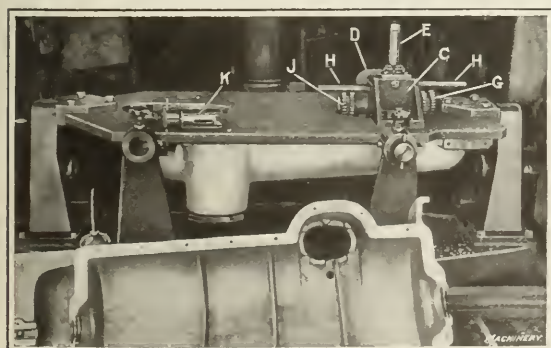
Jig in Drilling and Milling Position, showing Milling Attachment
